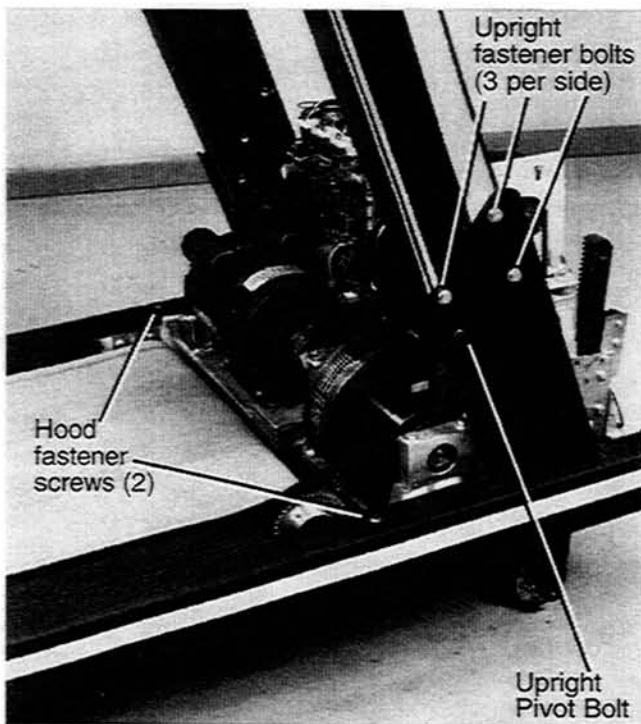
Upright Pivot Bolt and Fastening Bolts
